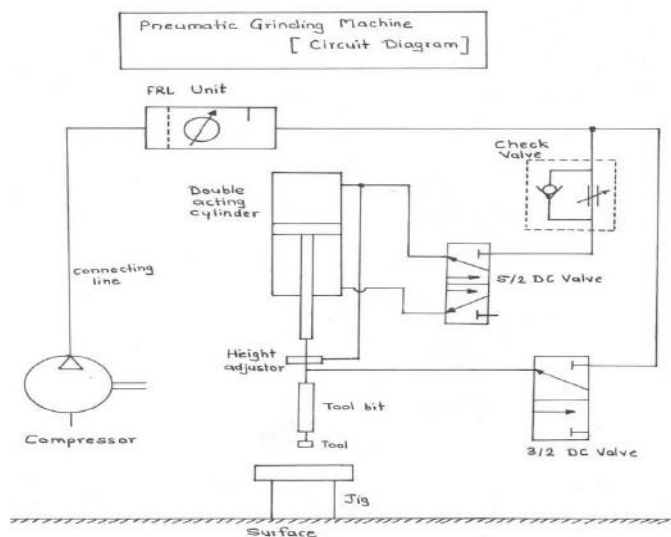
Experimental set-up of pneumatically powered grinding machine.
